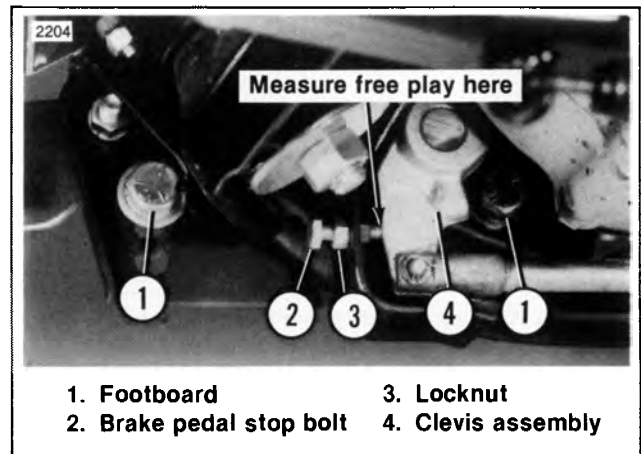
Rear Brake Free Play Adjustment — FLT
